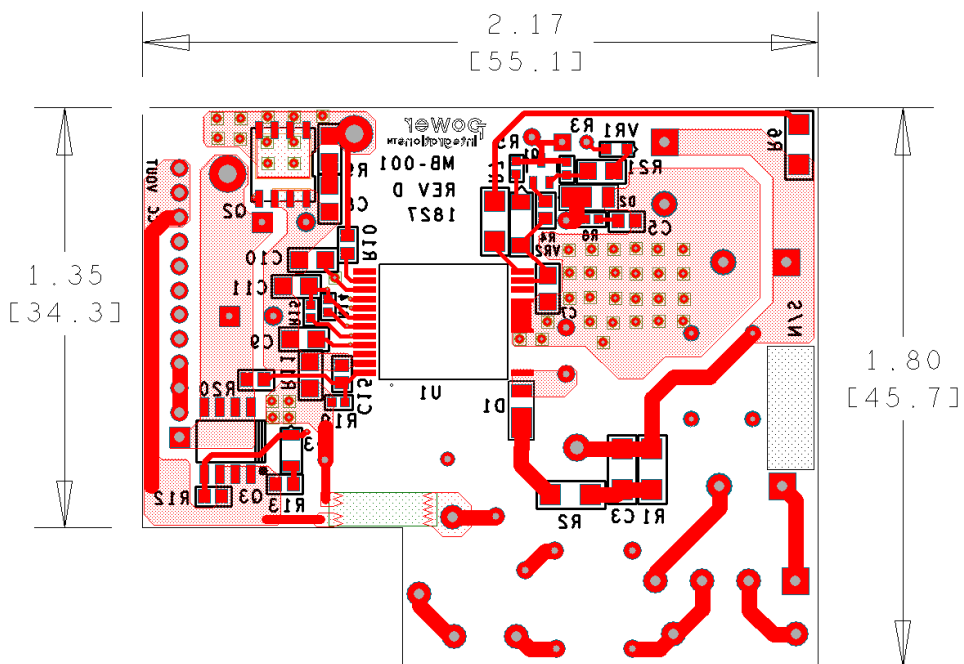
Printed Circuit Layout, Mother Board, Bottom.
